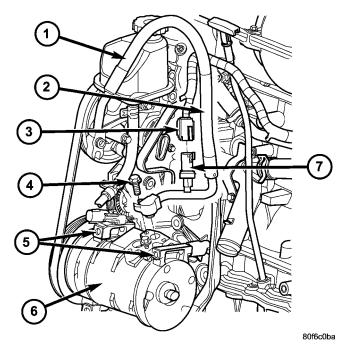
A/C Compressor Removal/Installation 2.4L Turbo
